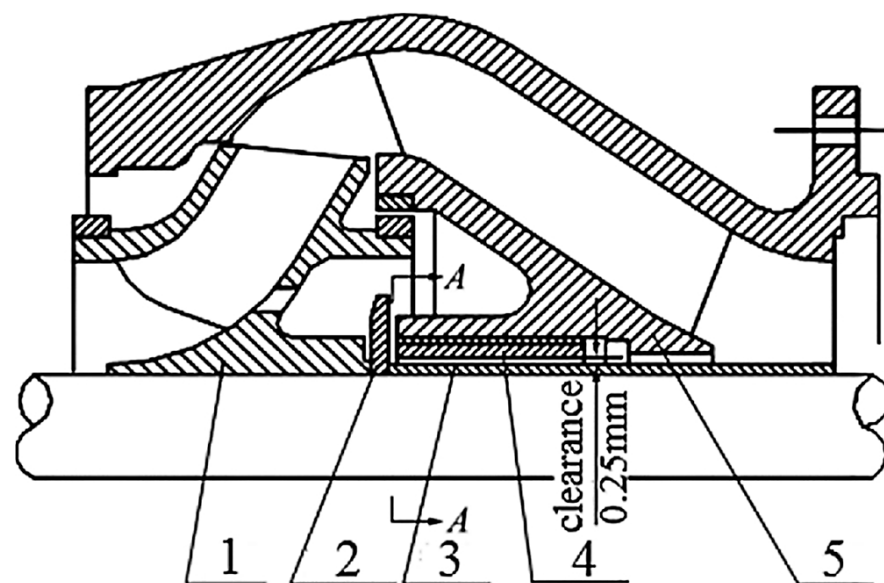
Deep-sea lift pump with bowl diffuser [14]. 1—Impeller, 2—Sand tray, 3—Shaft sleeve, 4—Bearing, 5—Bowl diffuser.
